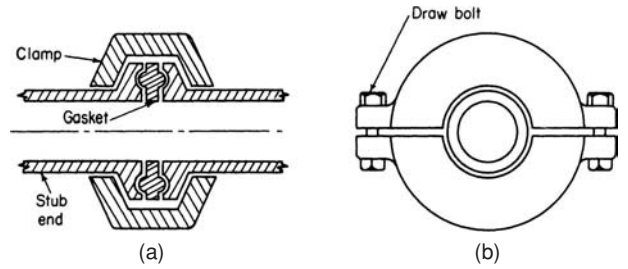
V-clamp joint. (a) Section. (b) End view.
